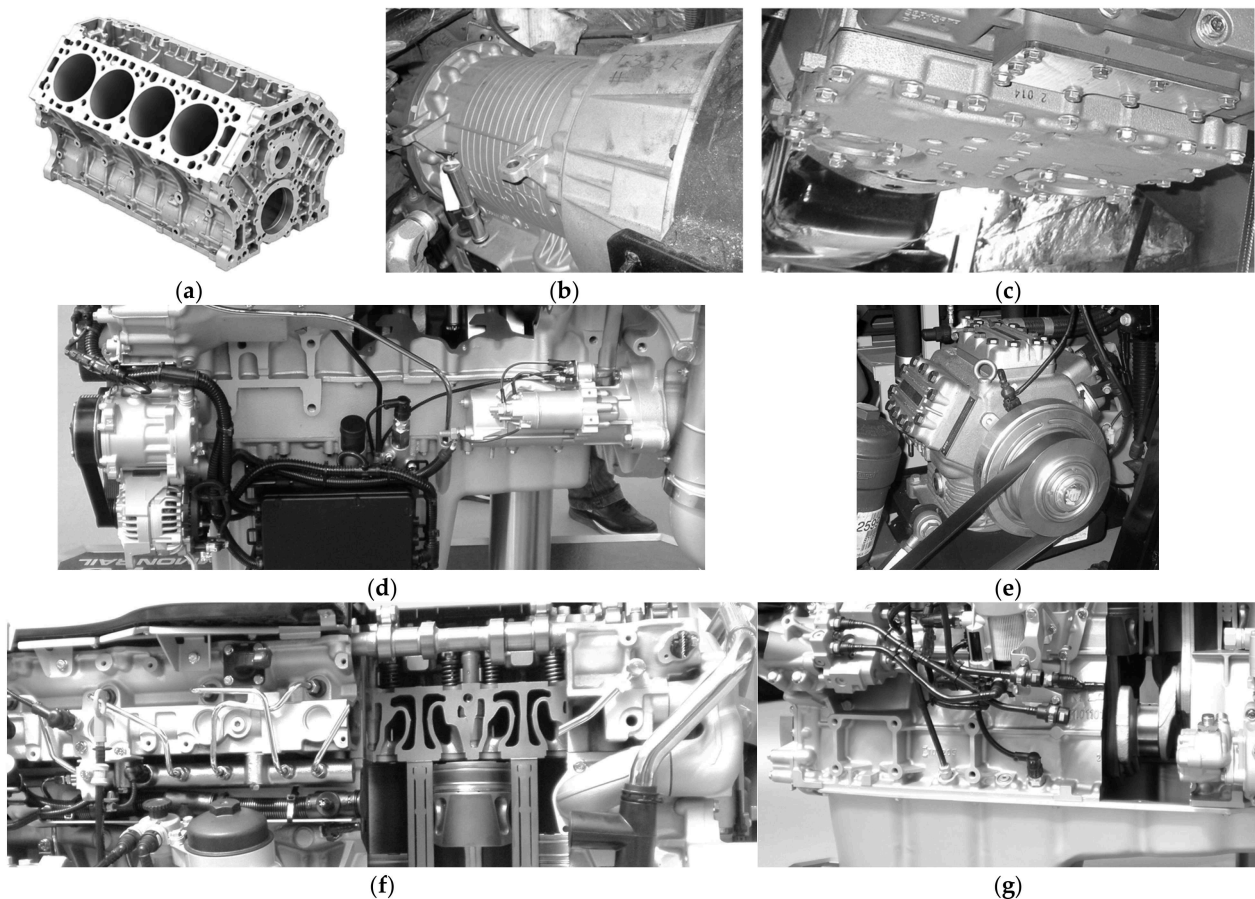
Photographs of Automotive Applications of Hypoeutectic Al-Si Alloys: (a) 3D model and cross-sectional view of a closed-deck V8 engine block made of A319 aluminium alloy; (b) A356 aluminum alloy housing of a six-speed automatic gearbox used in a city bus; (c) ADC12 aluminium alloy hydraulic valve body housing with internal channels and separator plate for an automatic gearbox; (d) A380 aluminium alloy alternator and starter motor housings mounted on a truck engine; (e) A356 aluminium alloy cylinder block of a reciprocating A/C compressor used in a city bus; (f) cross-section of the A356/A357 aluminium alloy cylinder head and cylinder of a six-cylinder truck engine; and (g) A380 aluminum alloy oil pan of a truck engine.
